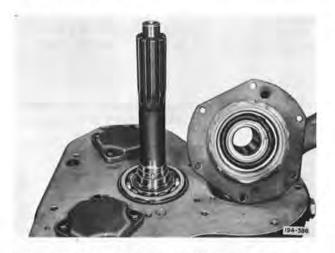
Gasket Installed on Compound Main Driving Pinion Bearing Cover
